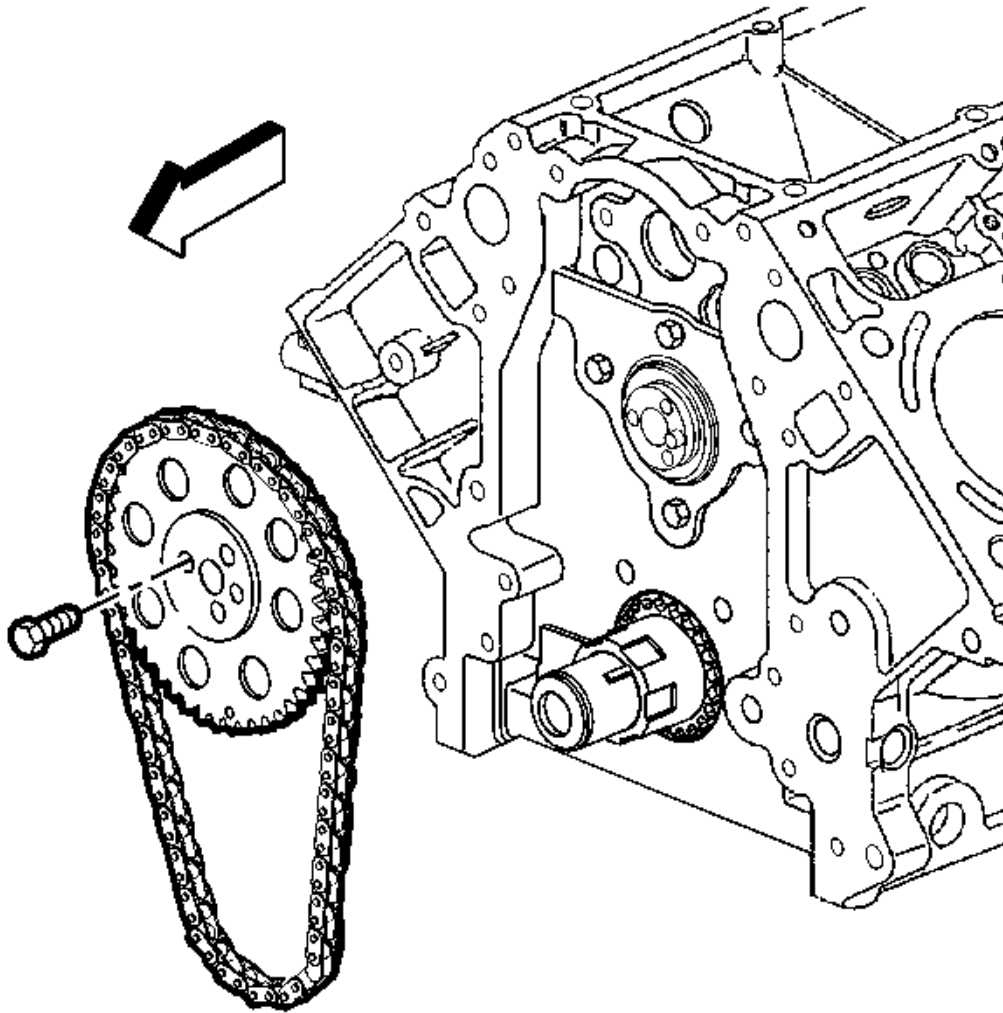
Camshaft Sprocket, Bolt & Timing Chain
